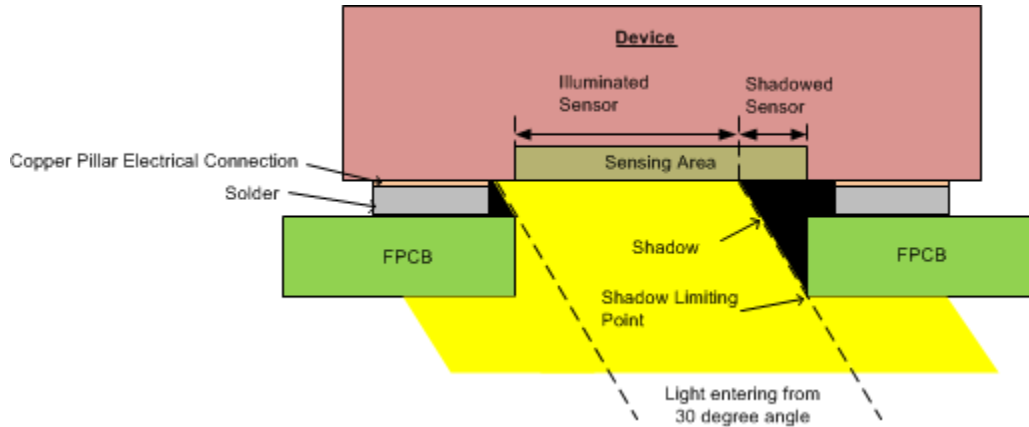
Cross-Sectional Diagram of PicoStar™ Device Soldered to an FPCB With a Cutout, Including Light Entering From an Angle
